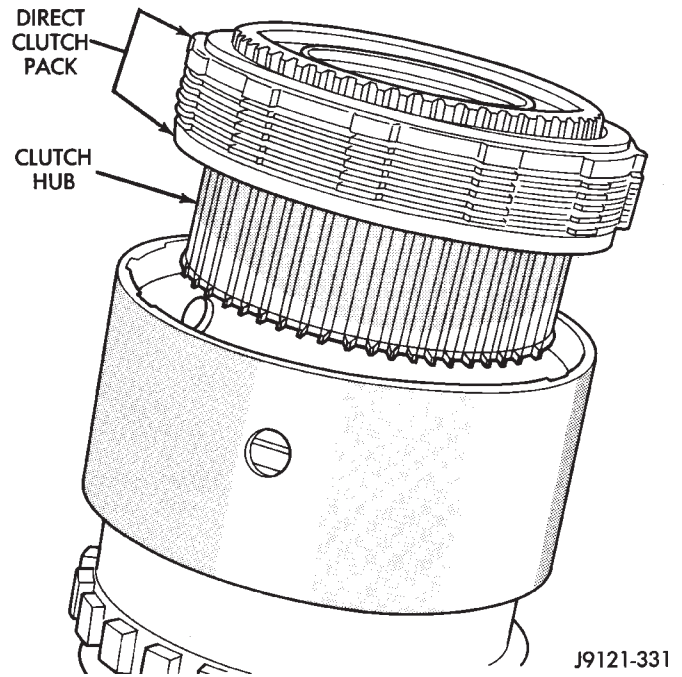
Installing Assembled Direct Clutch Pack And Hub
